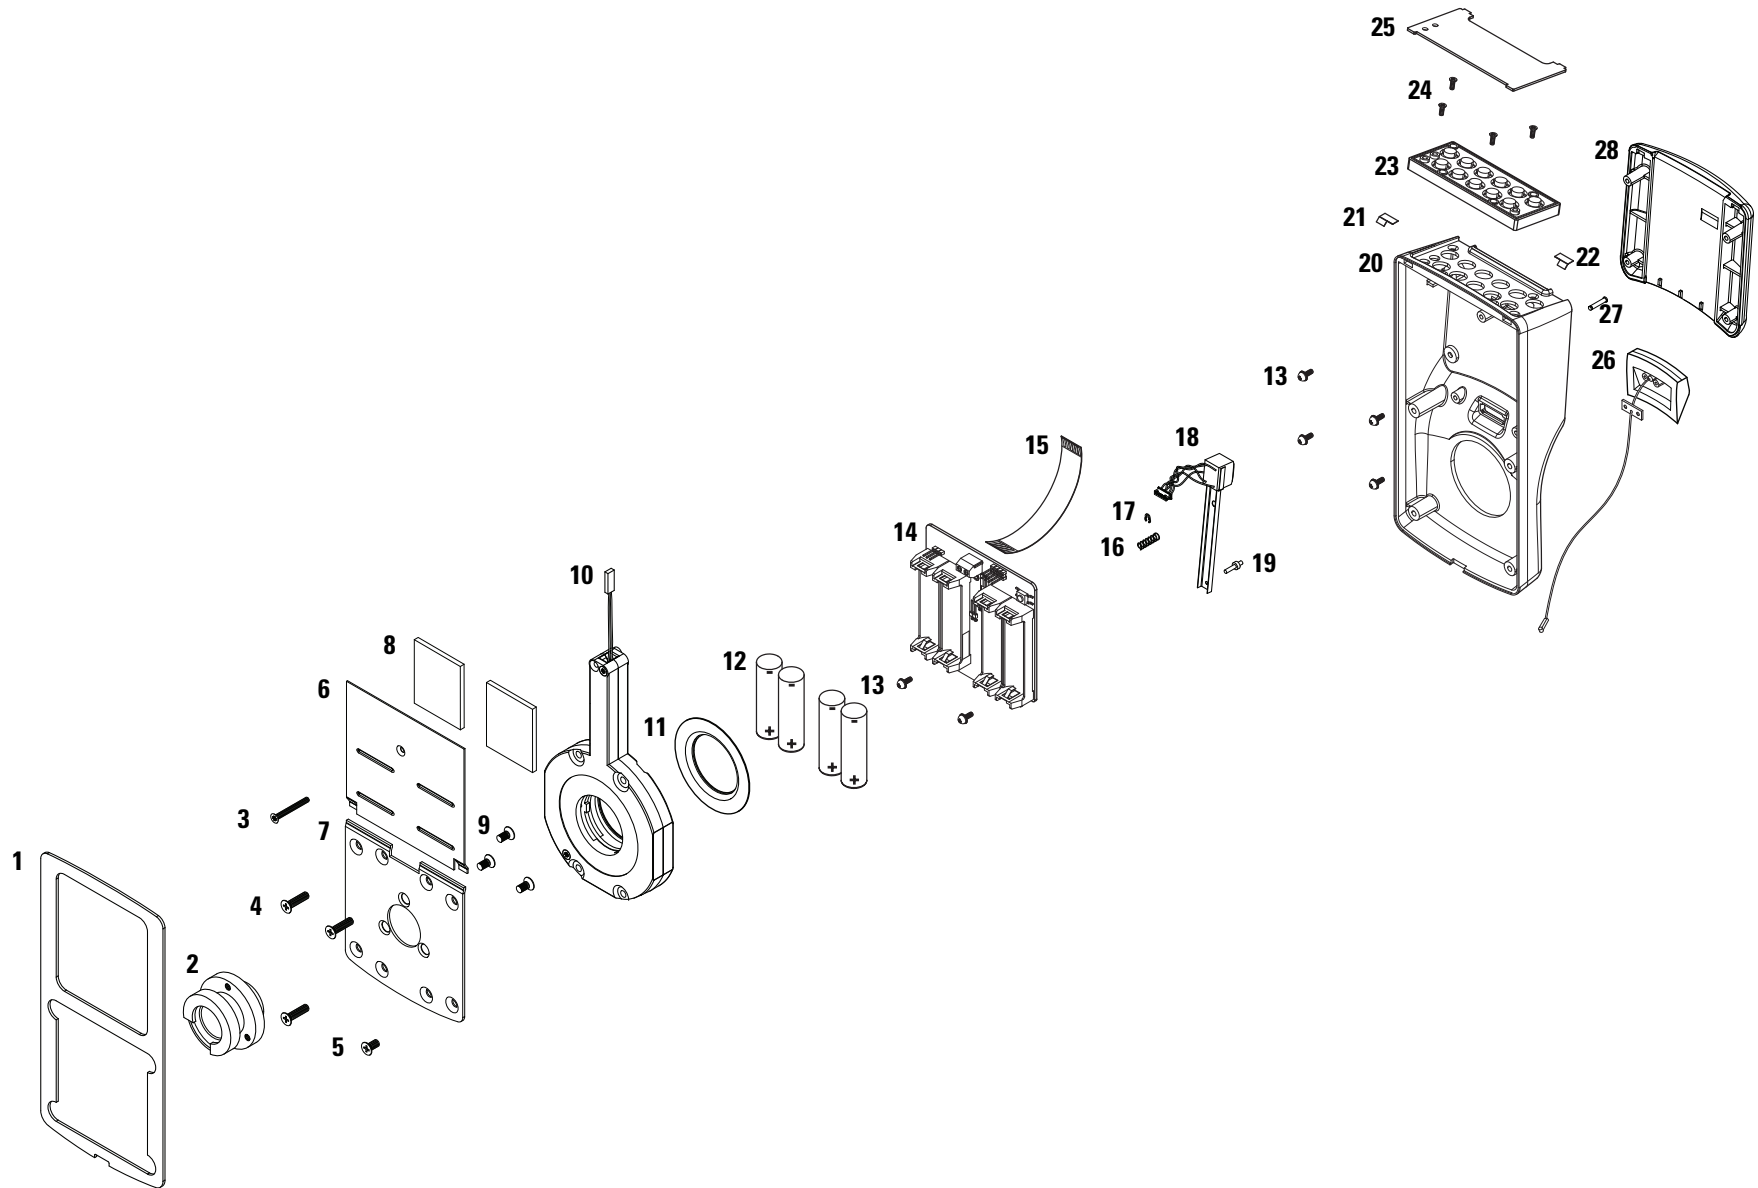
Magnetic stripe reader escutcheon assembly (WAMS shown)
